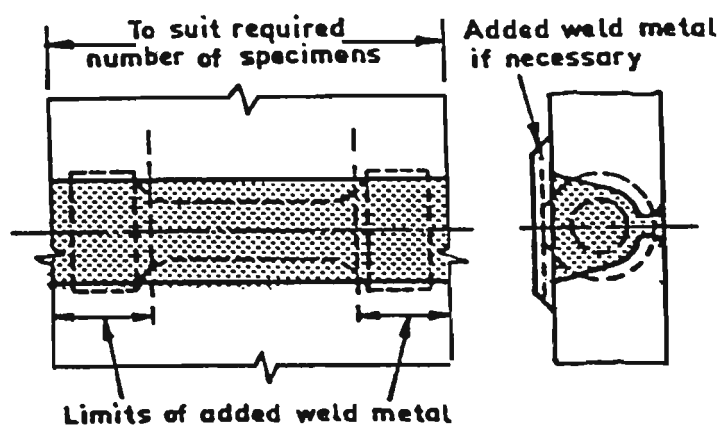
All weld metal tensile test specimens (After AS 2205).
